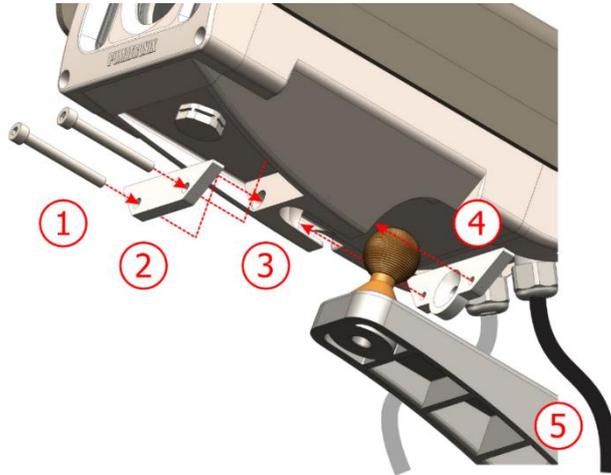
VIGIA+ Fastening Assembly: 1) M4 Allen screws 3mm (2 units); 2) Reinforcement; 3) VIGIA+ cavity; 4) Fastener
